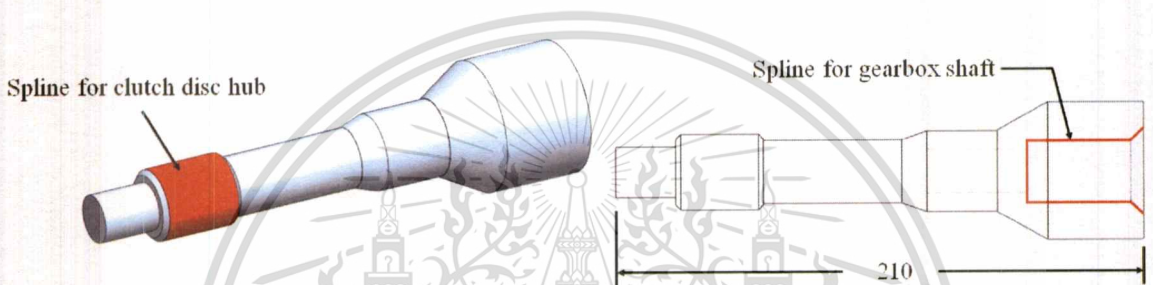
Gear shaft adapter CAD model (all dimension are in mm)
